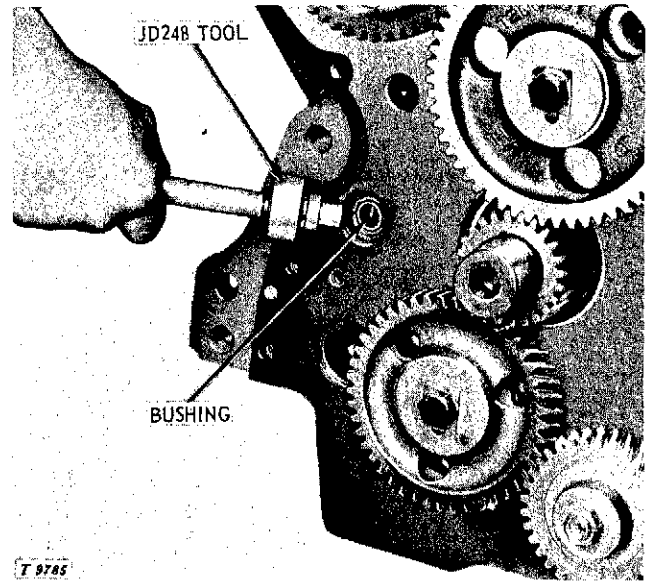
Pressing in Oil Pressure Regulating Valve Bushing
